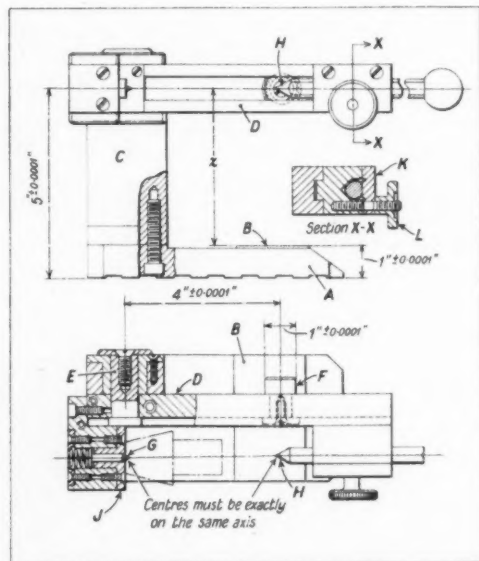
This Special Test Stand Provides for Measuring Angle of Taper. The Work-carrying Member has a Pair of Centres, and can be Adjusted for Angle with the Aid of Slip Gauges
